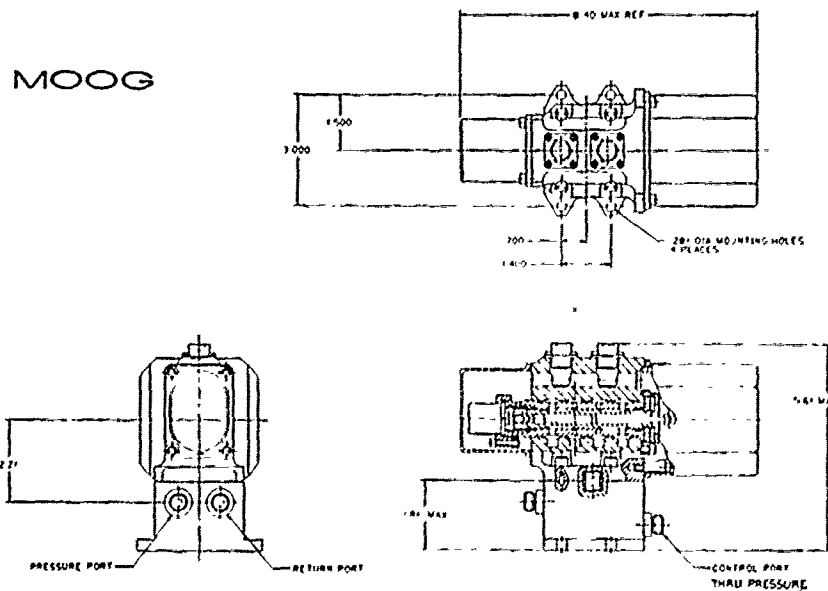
MOOG - Divergent Flap Servovalve Outline/Detail Drawing
